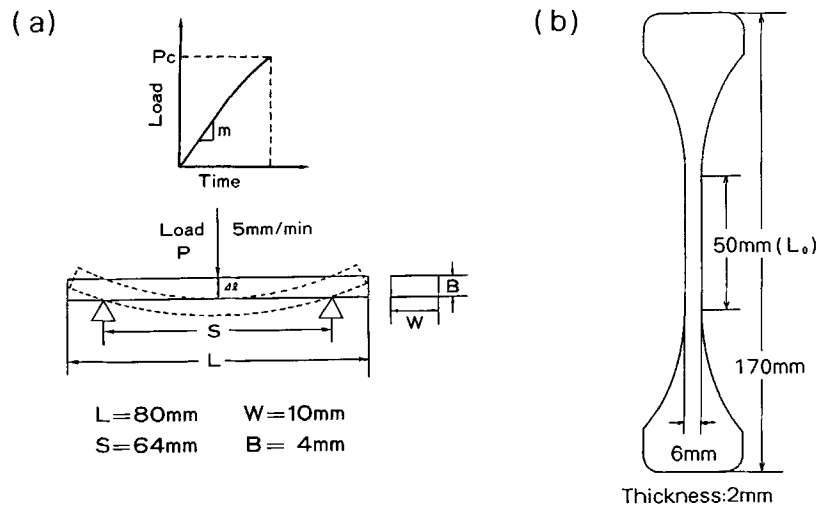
Shape and dimension of mechanical test specimens. (a), flexural test; (b), tensile test.
